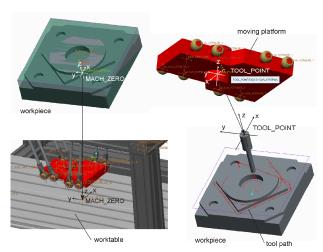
Coordinate system of the workpiece and tool with tool path simulation
